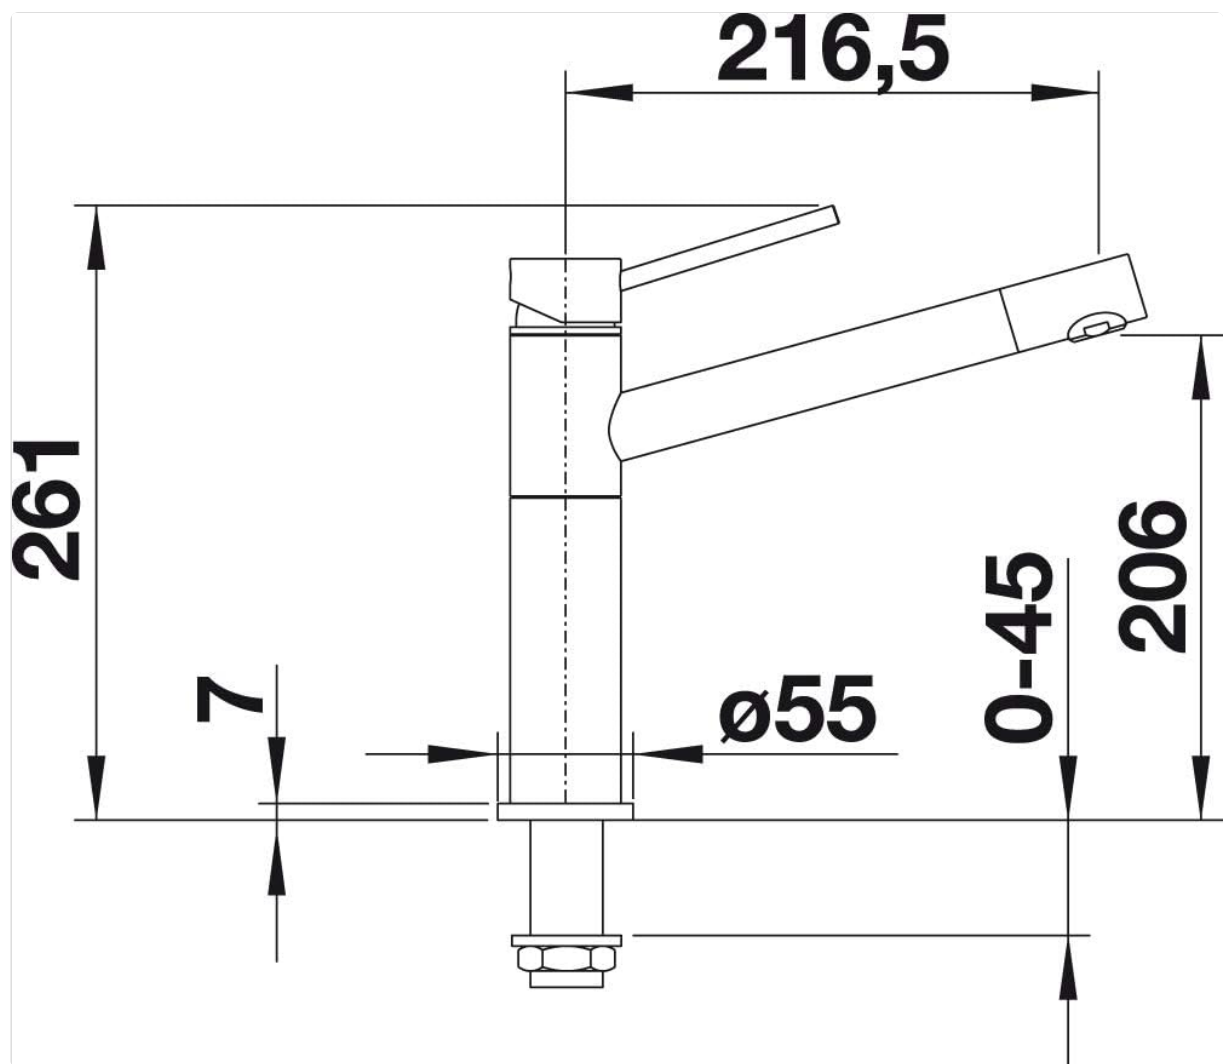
Technical drawing with dimensions. This diagram illustrates the critical dimensions for installation, including the required tap hole diameter and overall height and reach.
